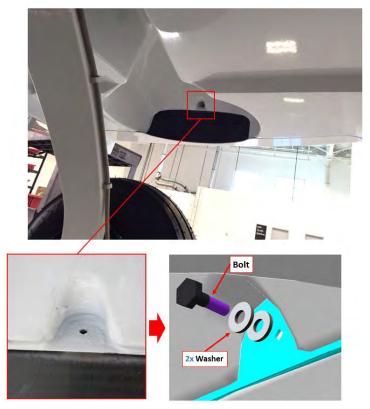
SEAWINGS™ ATTACHMENT HARDWARE
